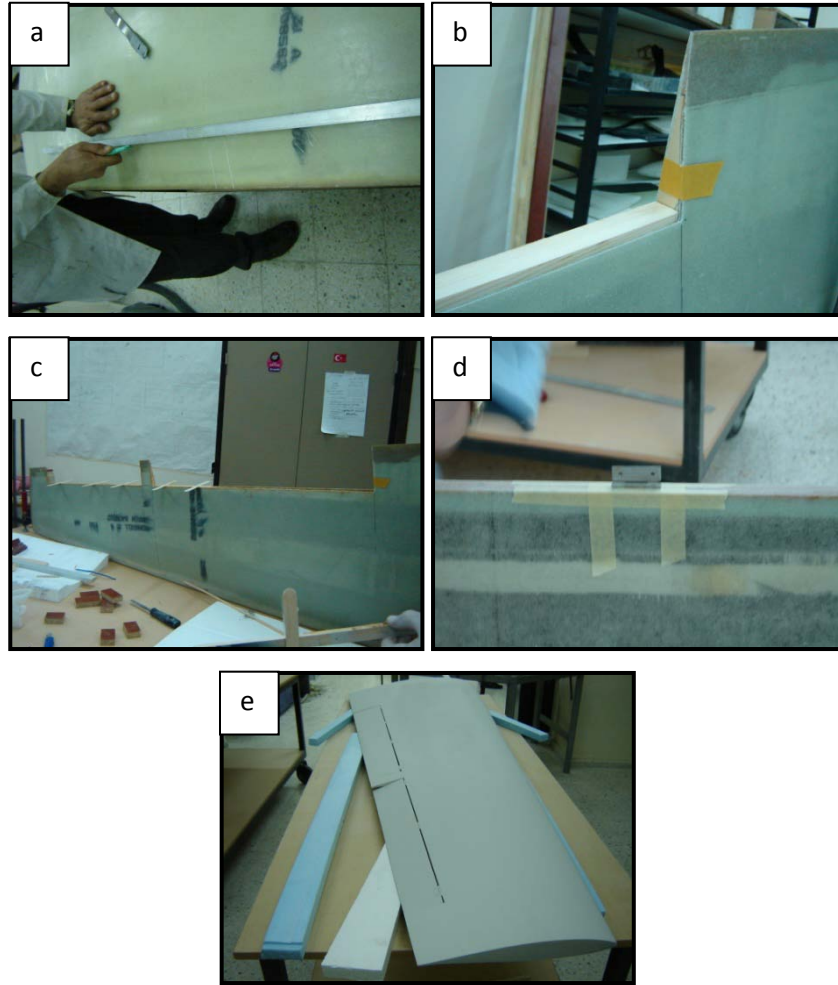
Control surfaces cut out of the wings (a), Gaps are filled with wooden parts (b) and adhesives (c), attached hinges (d), final view of control surfaces
